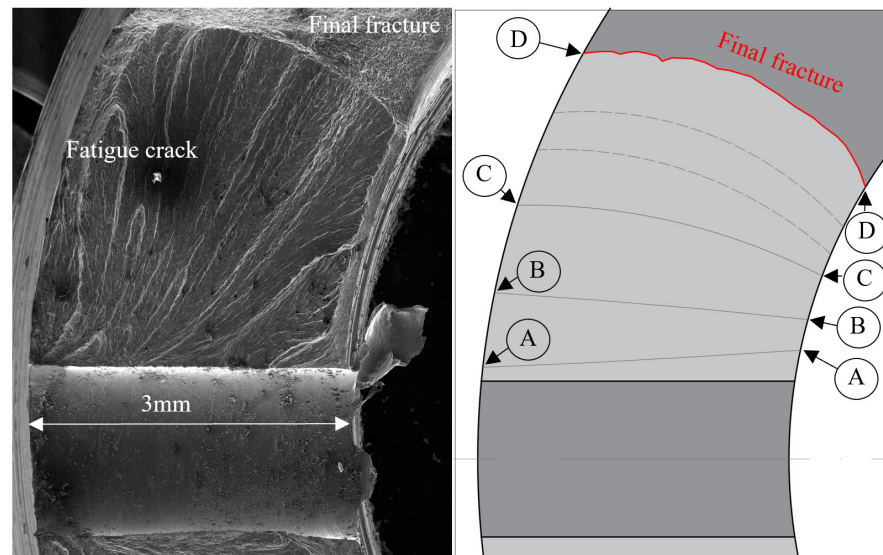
The fracture zone of a specimen with 3 mm wall thickness.
